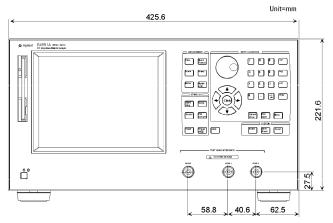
Main unit dimensions (front view, in millimeters, nominal)
